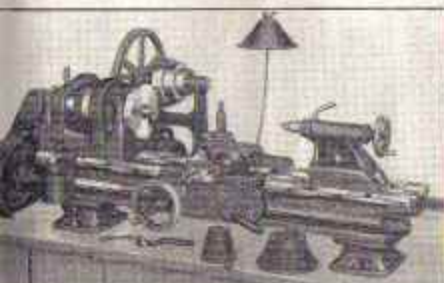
End View of 9-inch "Workshop" Precision Lathe with Horizontal Motor Drive Countershaft—Adjustable Type
